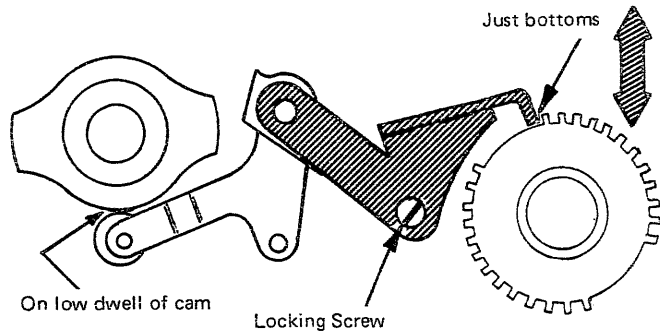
Shift Interlock (Level 2, 15-Inch Machines)
